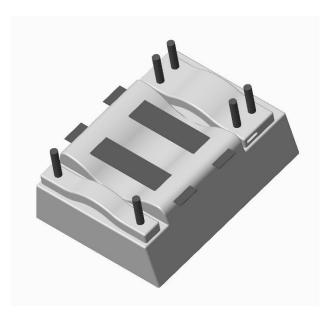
A CAD assembly of the casted two-bracket version of *Iteration V*.
